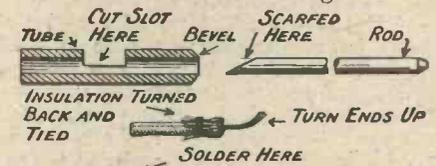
Details of the assembly of the tag are given in these drawings.
